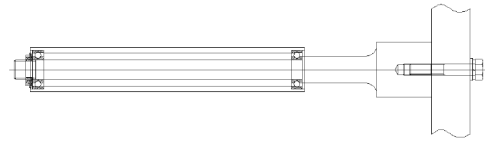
Design of cantilever type idler roller; dead shaft roller
